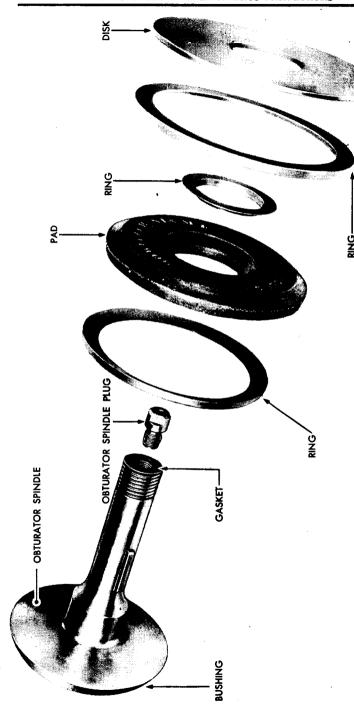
Obturator Spindle Assembly Used With the MI Firing Mechanism
